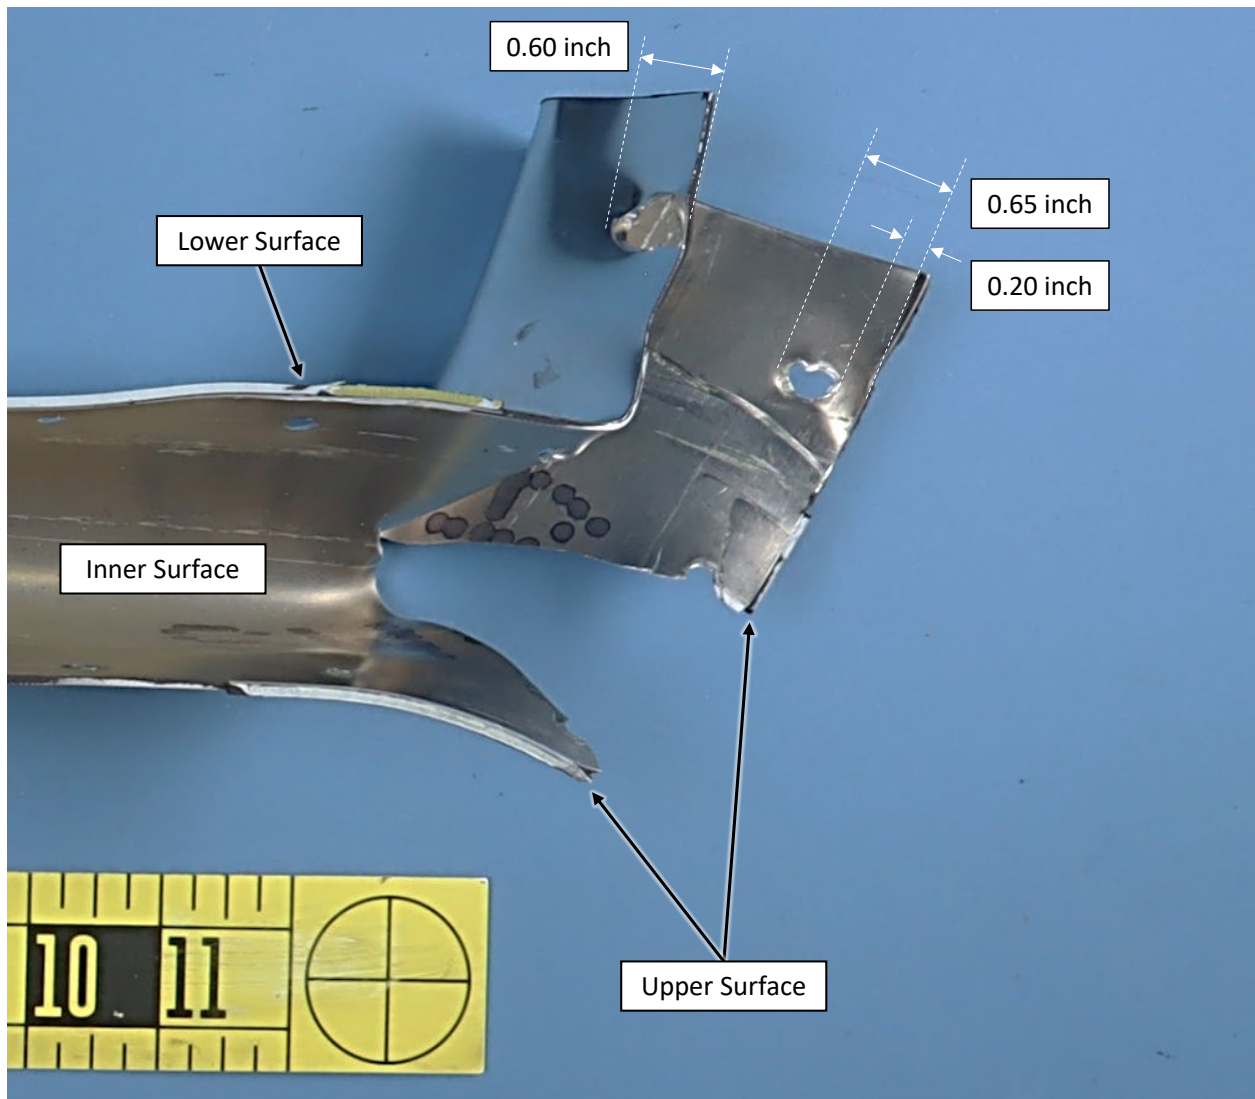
Photograph of the inner surface of the leading edge component showing the elongated outboard fastener hole locations as measured from the aft edge of the part.
